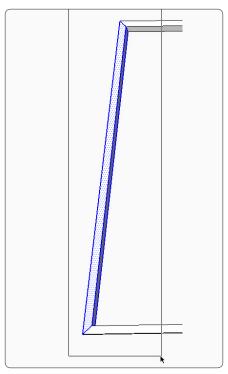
To begin making the frame into separate components, isolate one side and make it a new component.
